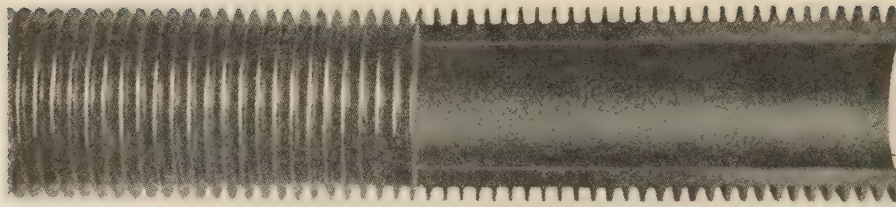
SECTION OF TUBE USED IN EXPERIMENTS
